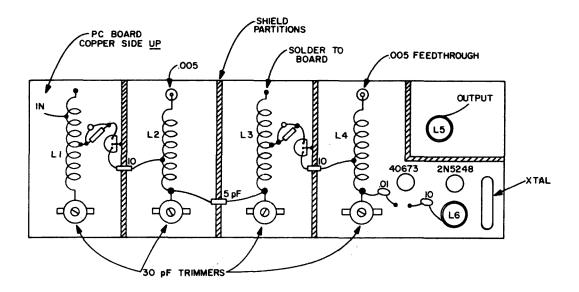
Parts layout. Exact layout shown need not be followed but shields should be placed between coils shown. Remaining components, as explained in text, are places on underside of board.
